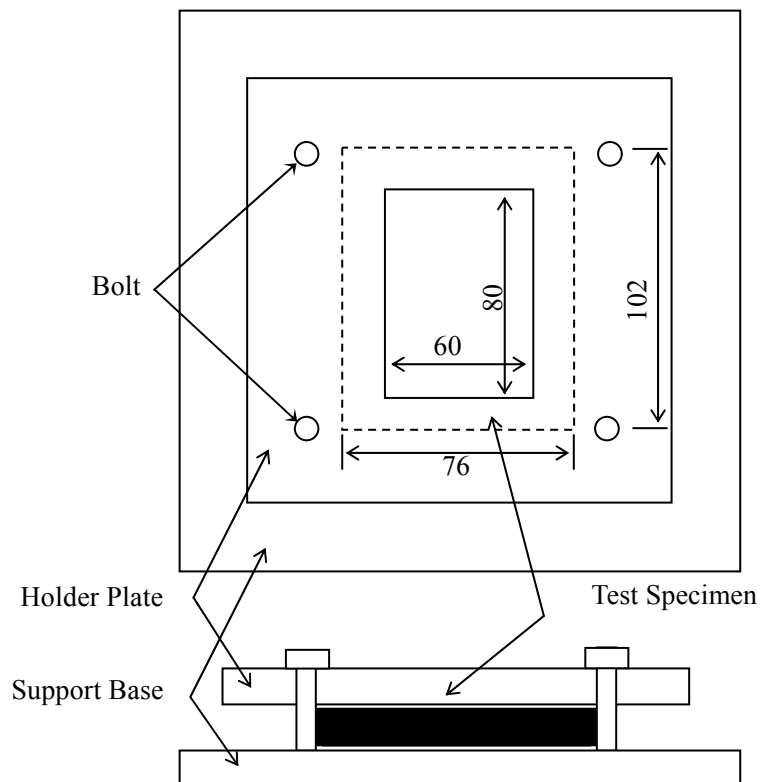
Schematic of the fixture of the drop weight impact test.
